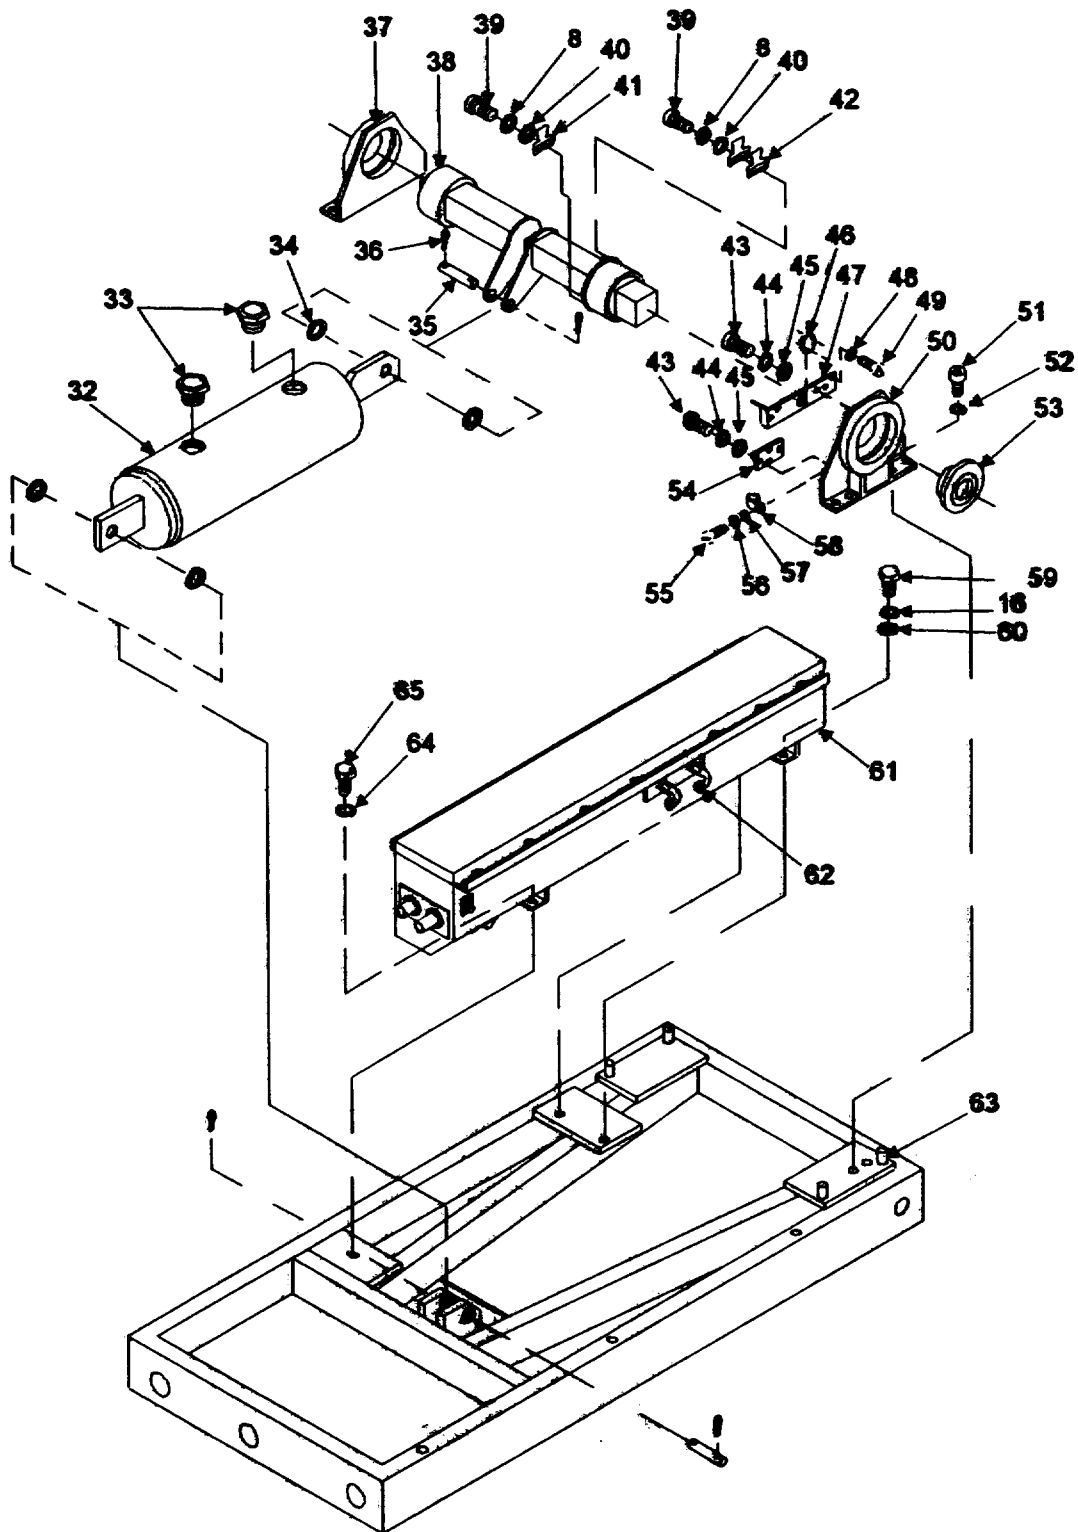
Tank Target Assembly 11784502-1 and 11784502-2 (Sheet 2 of 2)
